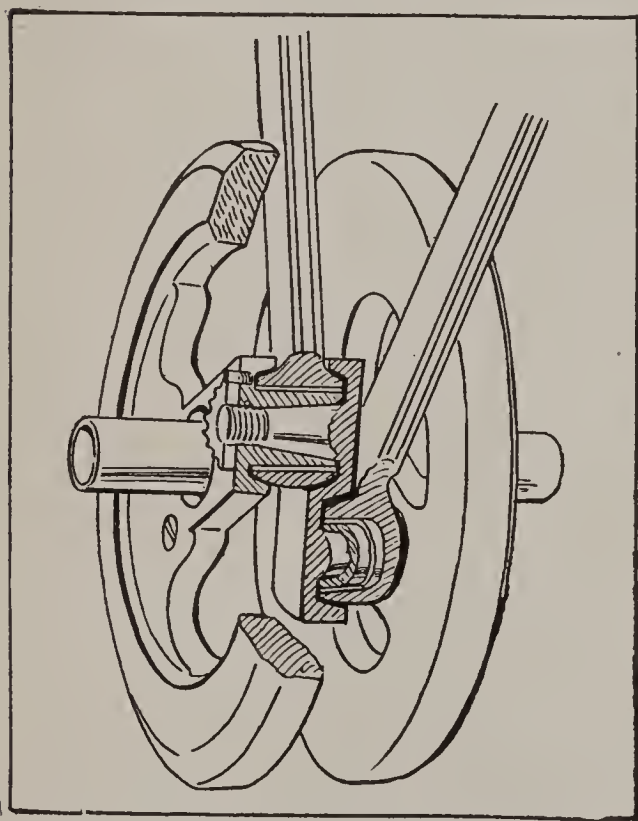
Crankshaft Arrangement of Iver-Johnson Twin Motor.
